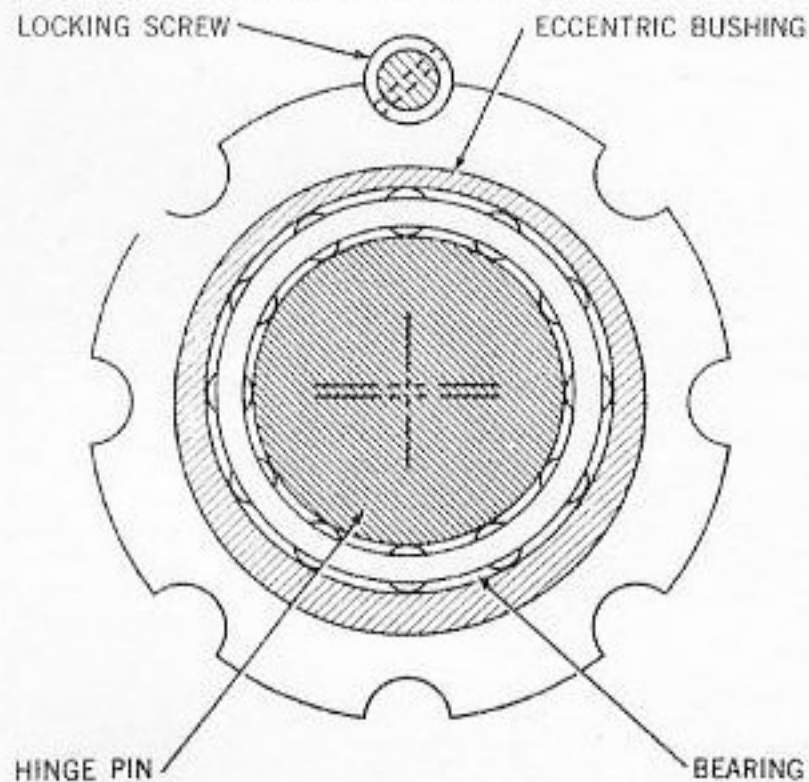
Breech Mechanism Carrier Hinge Adjustment
